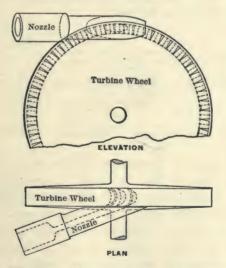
DE LAVAL STEAM-TURBINE. ARRANGEMENT OF WHEEL AND NOZZLE.
